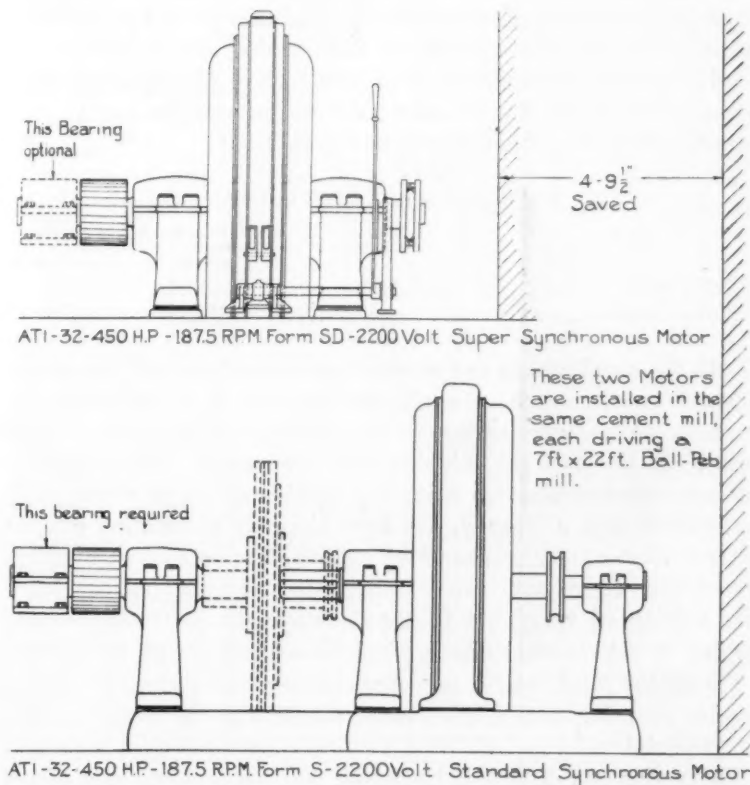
THE RELATIVE OVERALL LENGTHS OF THE SUPER SYNCHRONOUS MOTOR AND THE STANDARD SYNCHRONOUS MOTOR WITH THE EXTRA BEARING AND CLUTCH NECESSARY FOR ANY BUT THE LIGHTEST STARTING DUTY
